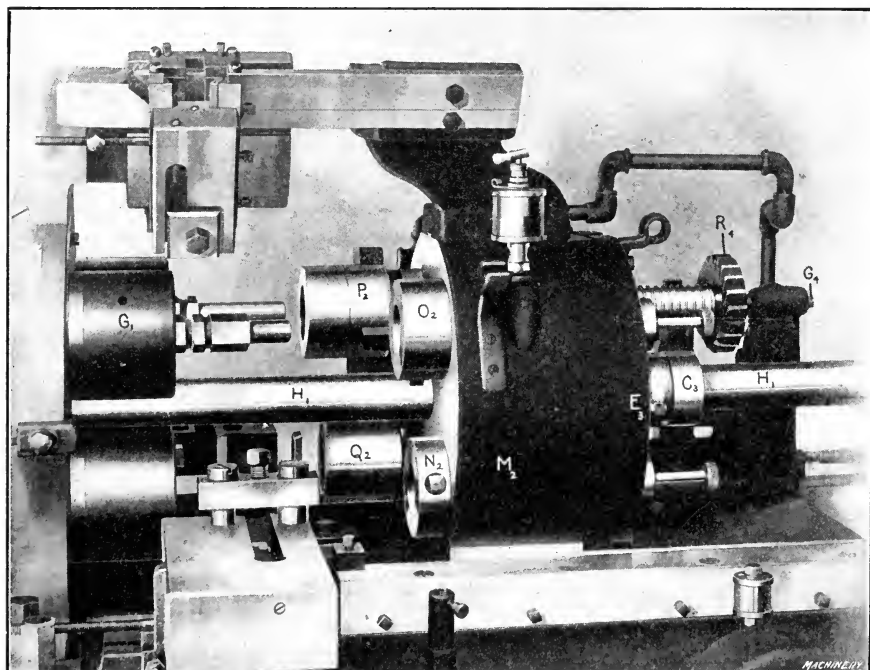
Main Tool-slide and End-working Tool-holding Spindles
